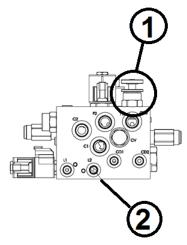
Front Belt Motor Adjustment Key 1 – Hand Valve Key 2 – Manifold (reference)
